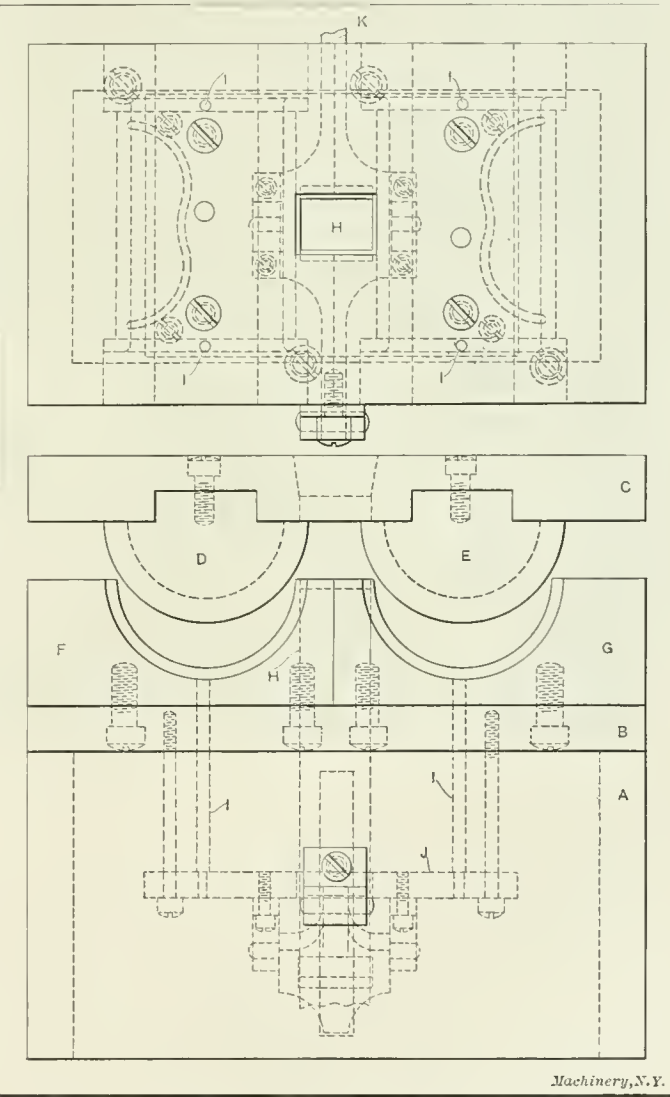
Casting-die for the Half-round Bearing shown in Fig. 14
